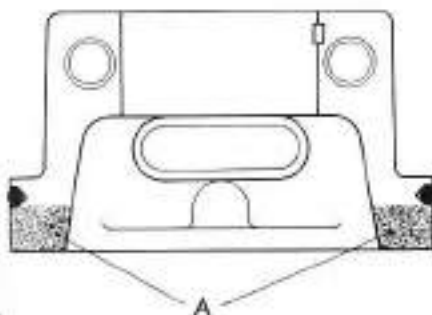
When installing front main bearing cap on three-cylinder engine, coat area at front of seal ring (indicated by shaded area "A") with a light film of gasket sealer.
